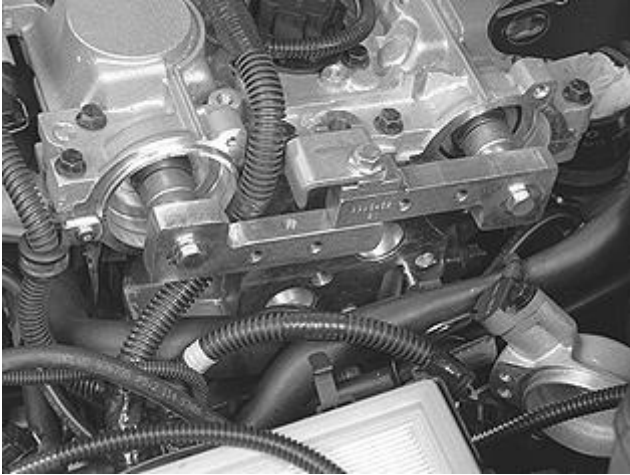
Identifying Camshaft Adjustment Tool 9995452 Installed
